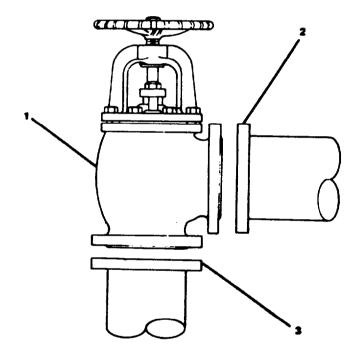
2-1/2-Inch Stop Check Angle Valve.
